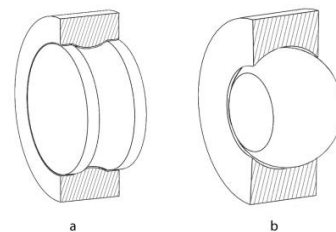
a) Concave shaped pin and convex shaped hole joint; b) convex shaped pin and concave shaped hole joint
